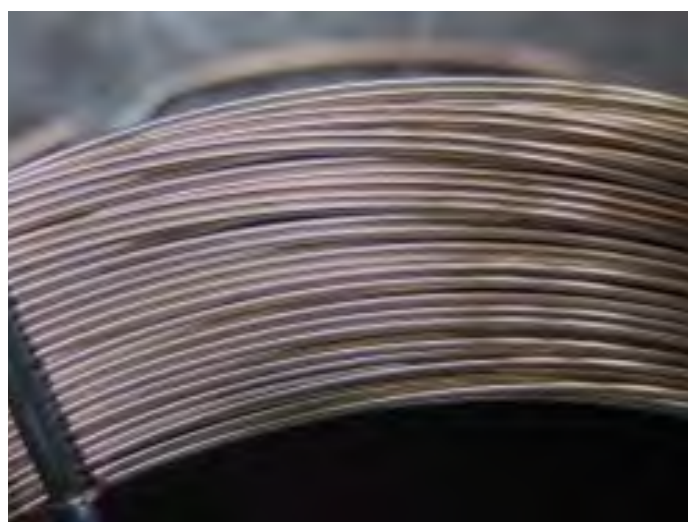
Side view of the reel no. 63 revealing non-uniform winding
